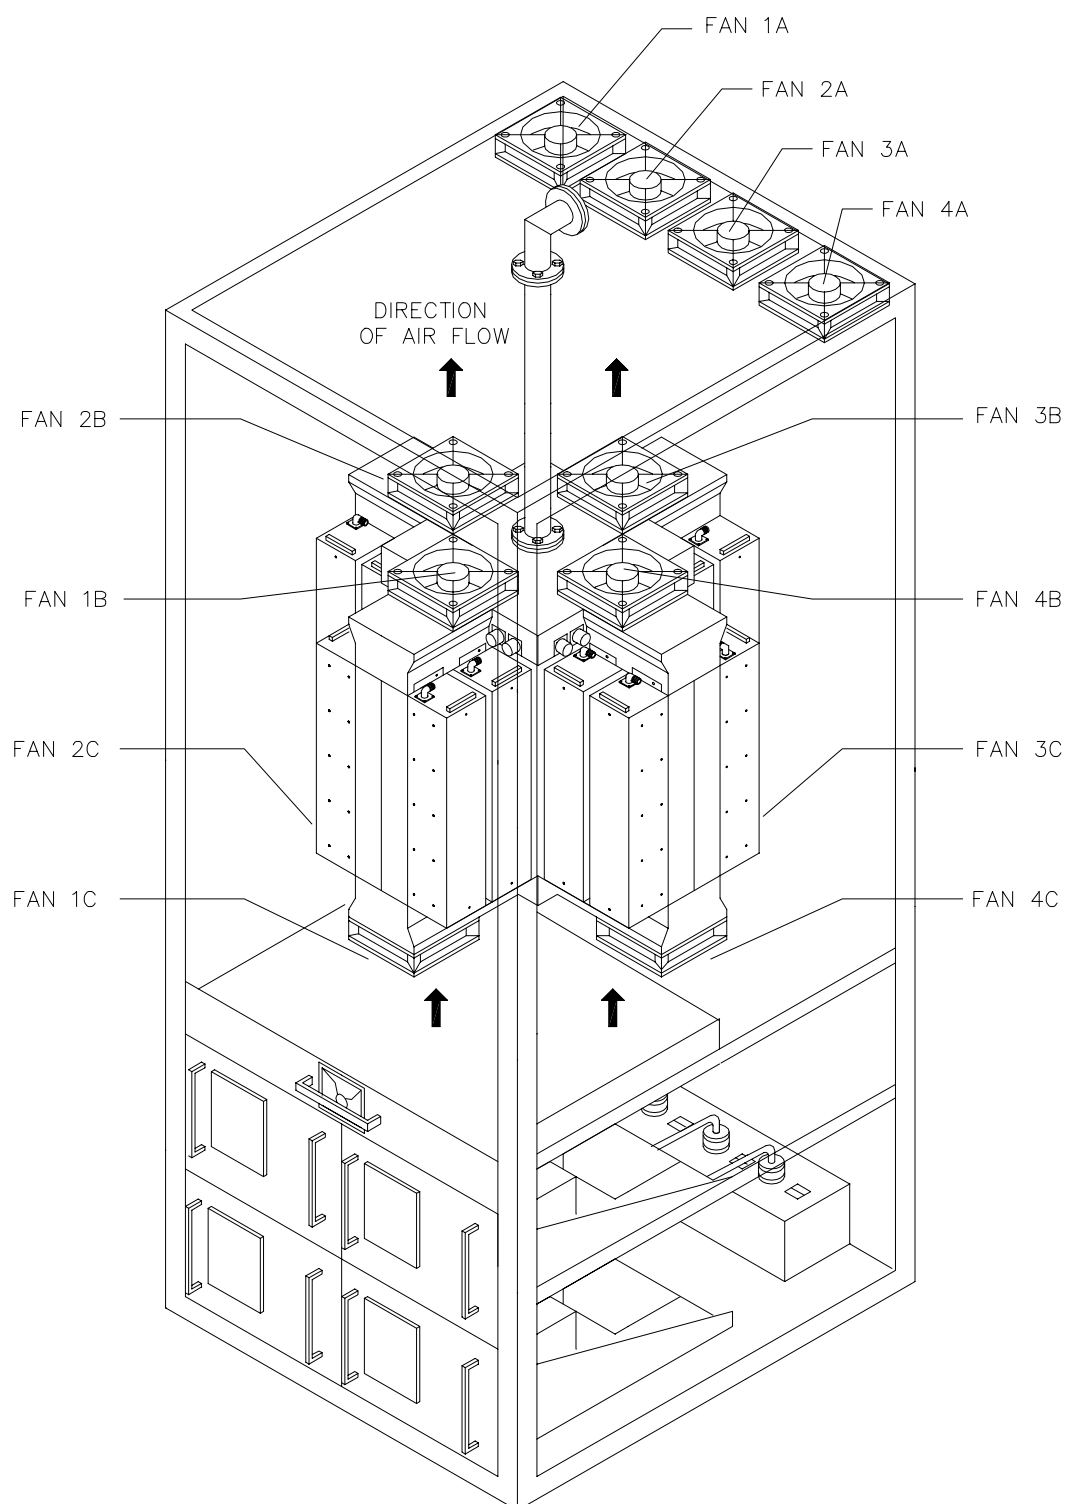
PA Cabinet Cooling Fan Assemblies
